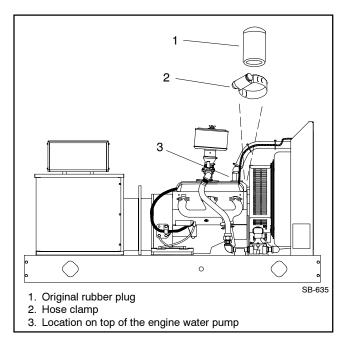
Original Rubber Plug on Engine Water Pump (50 kW Generator Set shown)
